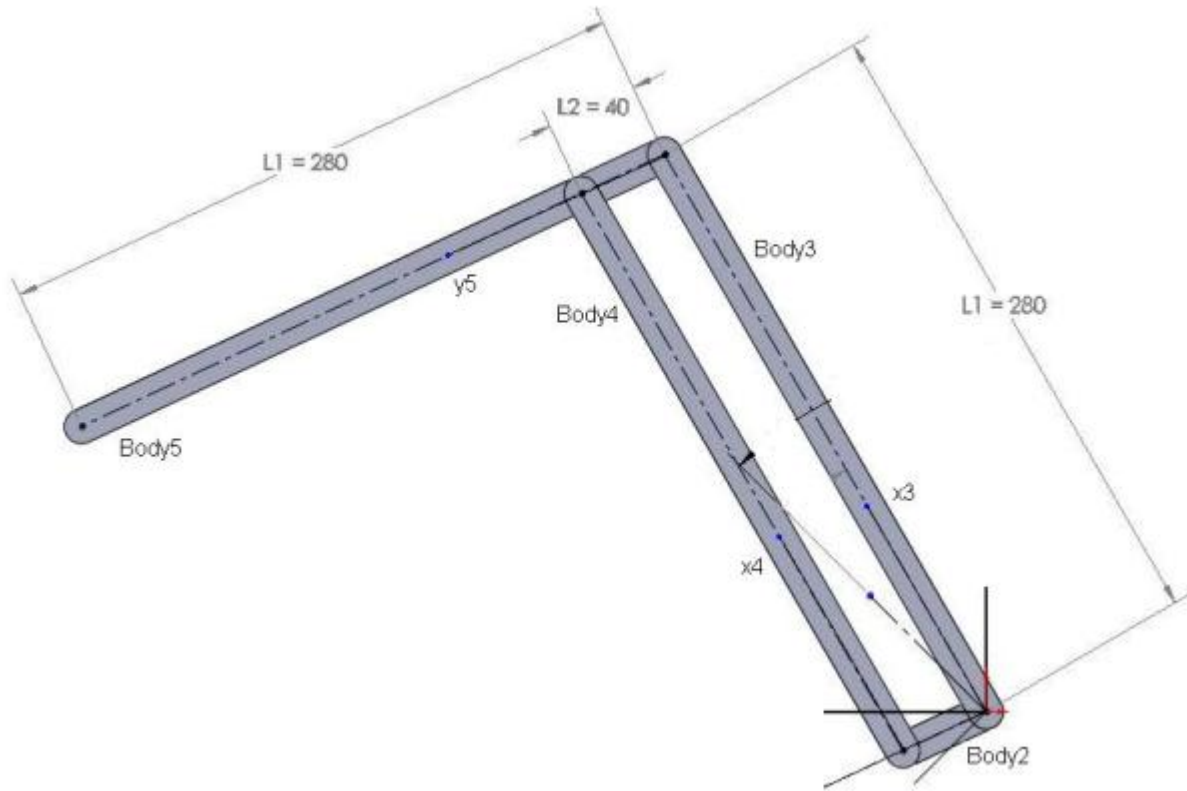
5-bar mechanism which makes up links 2 and 3 [28]
